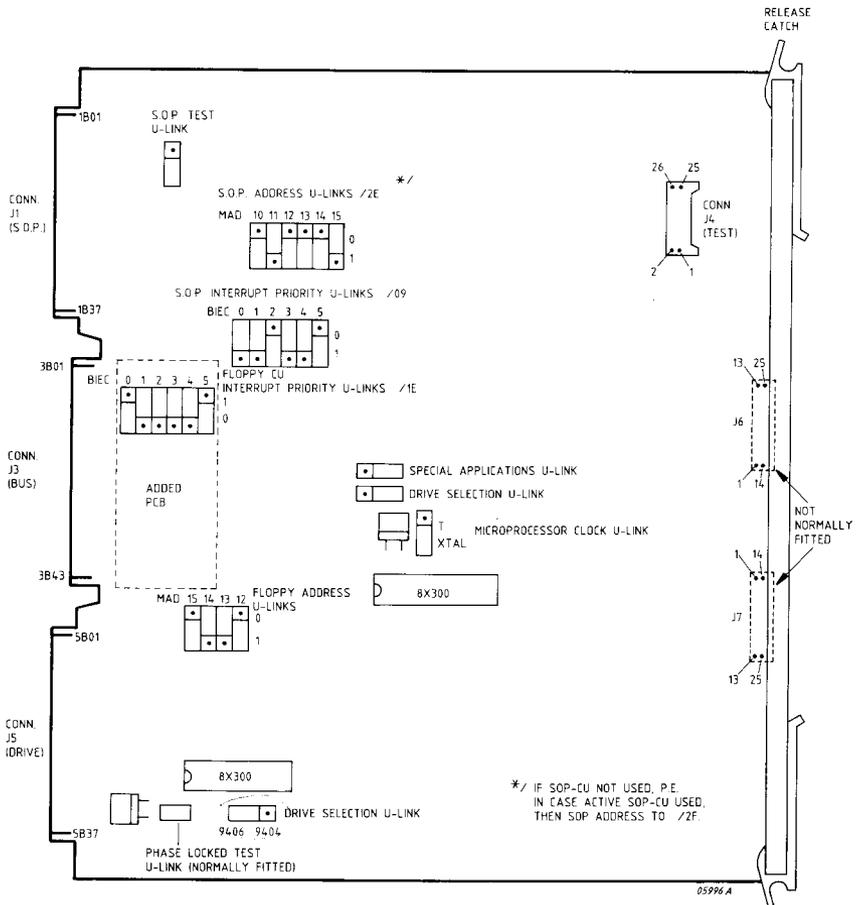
LAYOUT OF F1MB CARD WITH ADDED PCB
